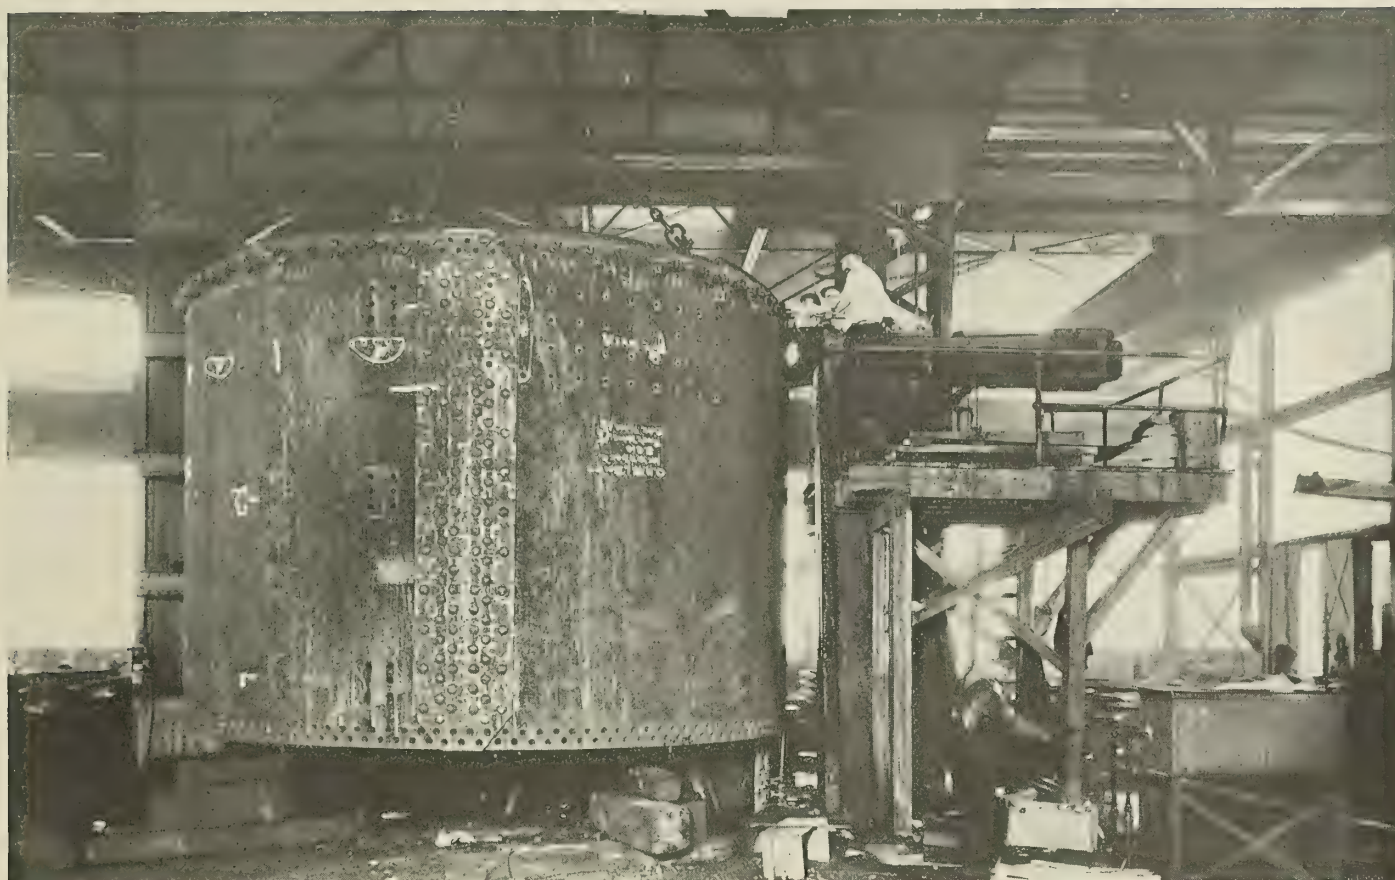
Fitting Up Head in Marine Boiler Shell
